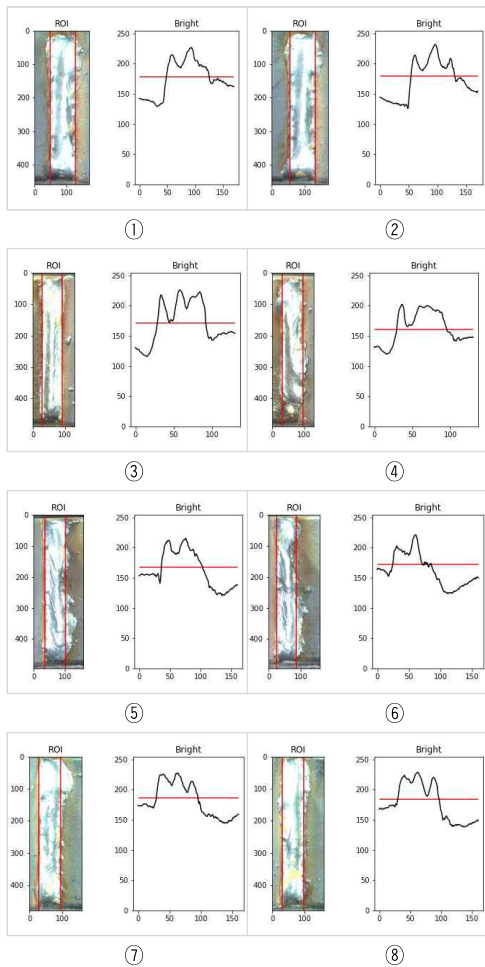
Segmentation result for the horizontal direction of the welding bead
